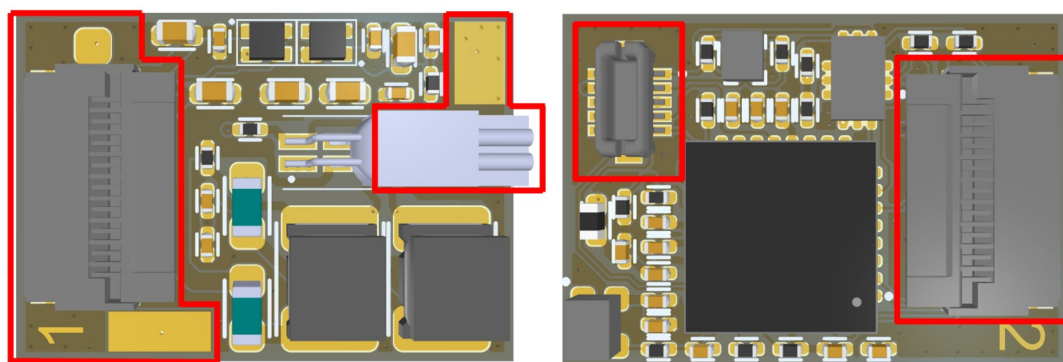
Left: Headstage top side drawing. Right: Headstage bottom side drawing. Areas which are not covered with conformal coating are indicated in red.
